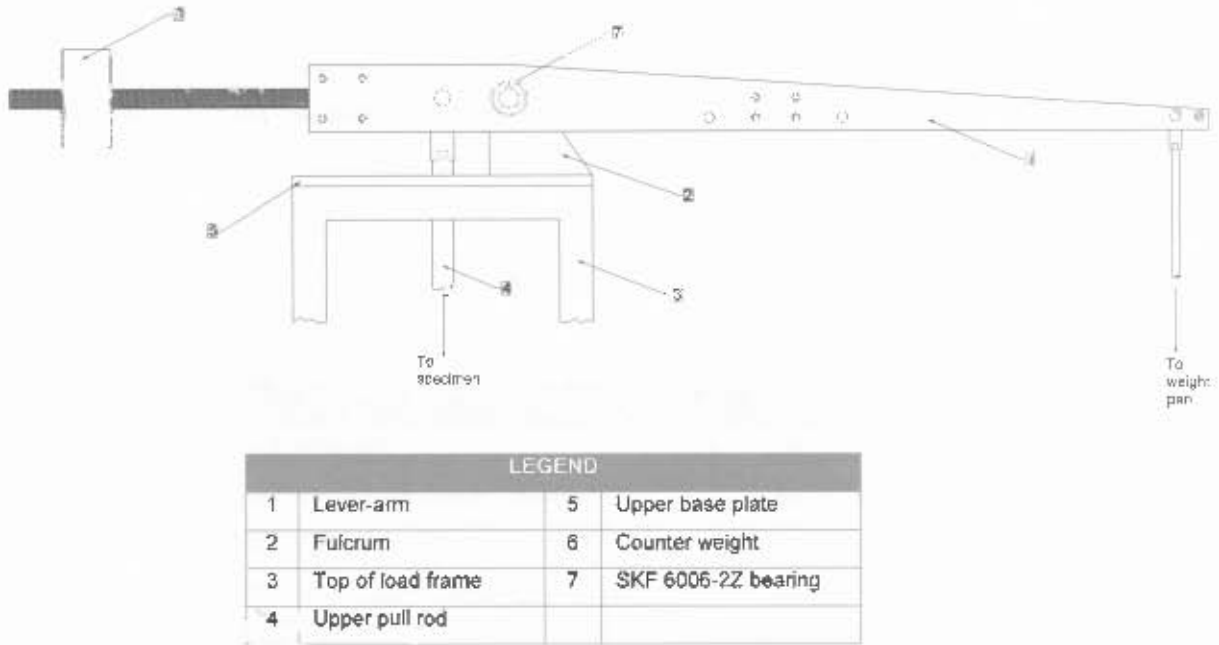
Assembly of lever, fulcrum and upper base plate.
